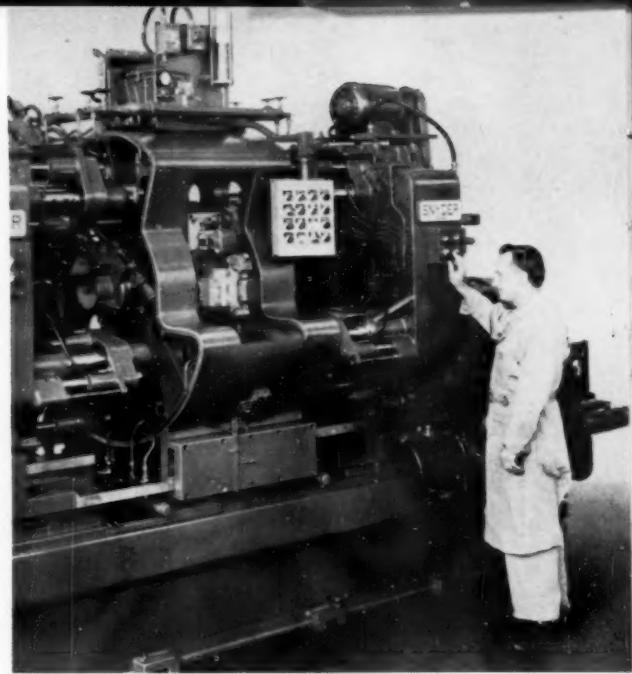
(right) Trunnion type machine for processing coal mining rock bit holder details.
